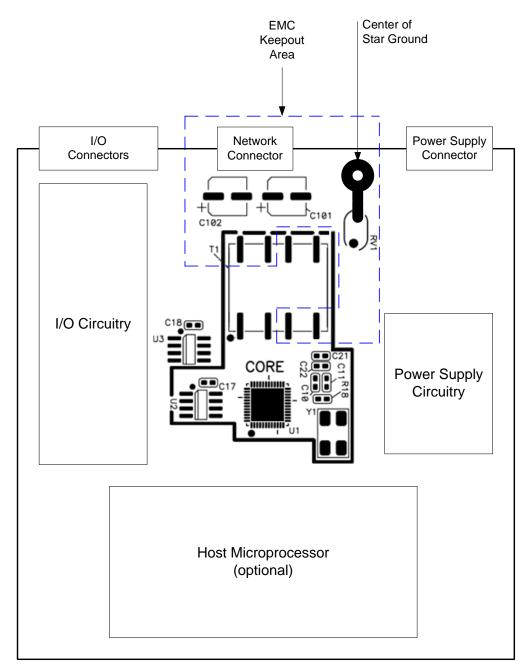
Example PCB Layout Design for an FT 5000 Smart Transceiver
